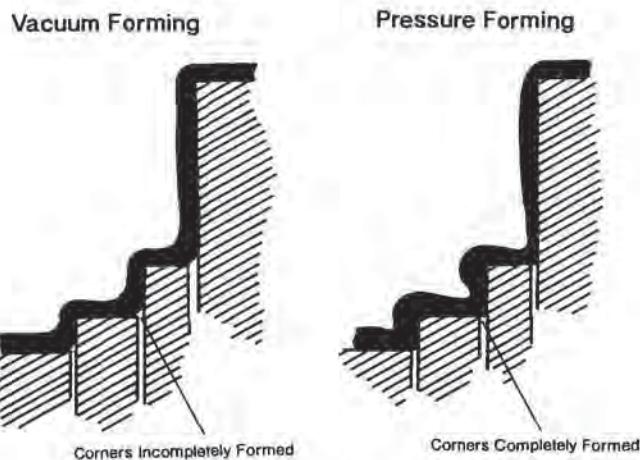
Pressure forming (right) yields details on female portions of the mold surface that have greater sharpness than those produced by vacuum forming (left)
